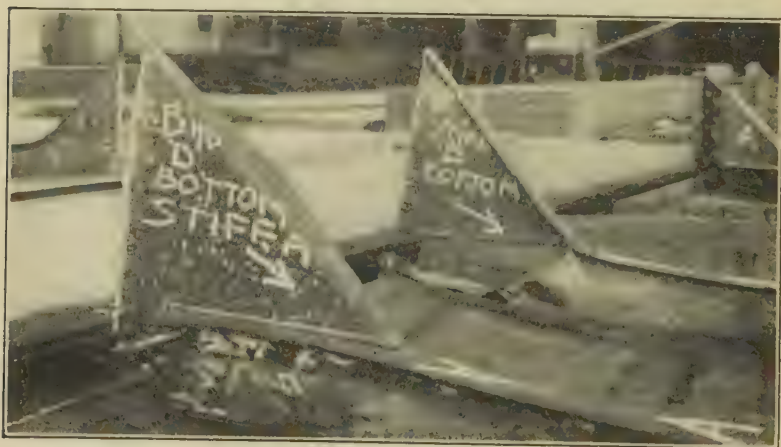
Damage to the bottom brackets of the stiffeners on bulkhead C. Note that B stiffener is intact, but that the plating has broken away along the welded lap.
